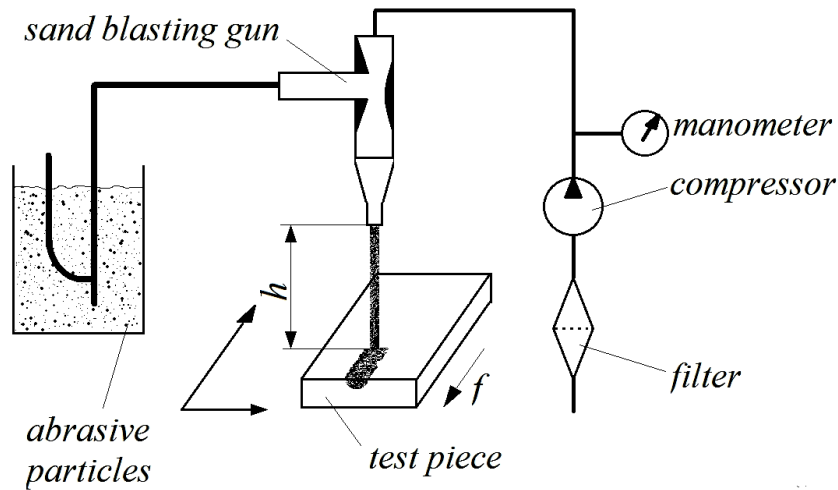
Schematic representation of the equipment for surface abrasive jet machining
